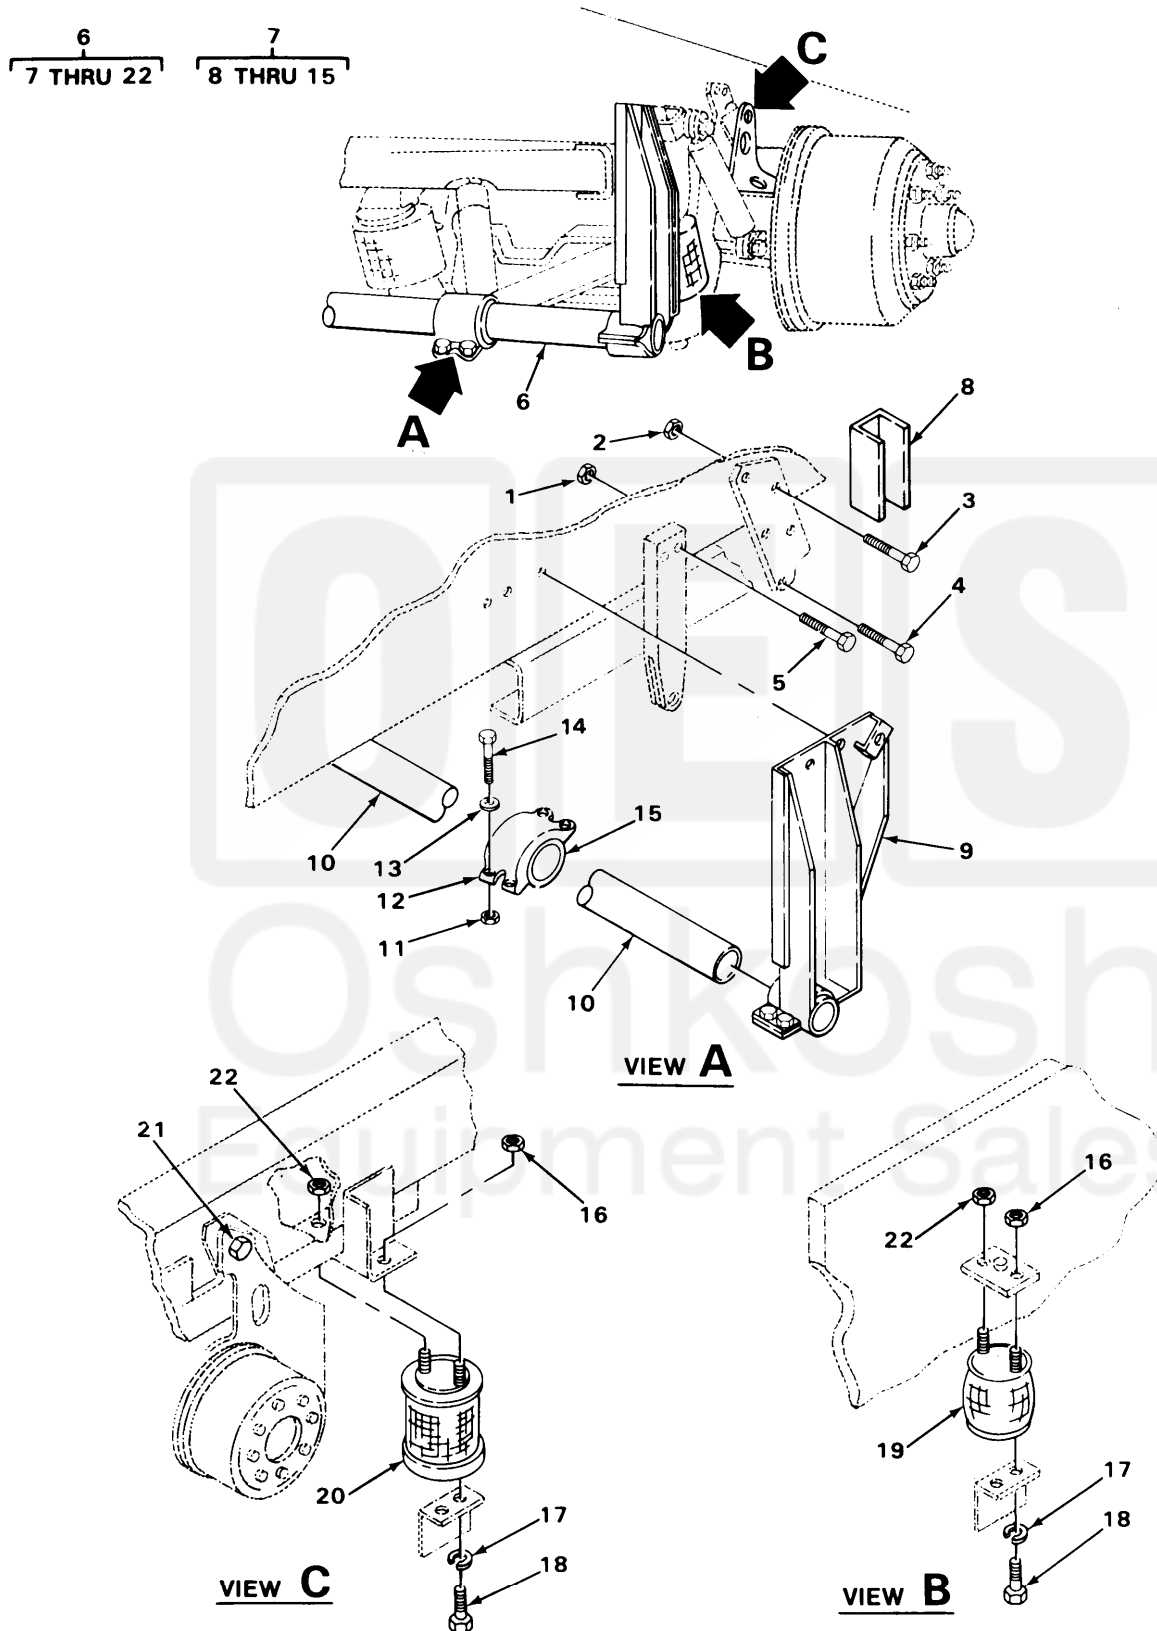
PUSHER AXLE, SUSPENSION ASSEMBLY, AND AIR RIDE SPRING LOBE ASSEMBLY (MODELS M917, M919 AND M920).
